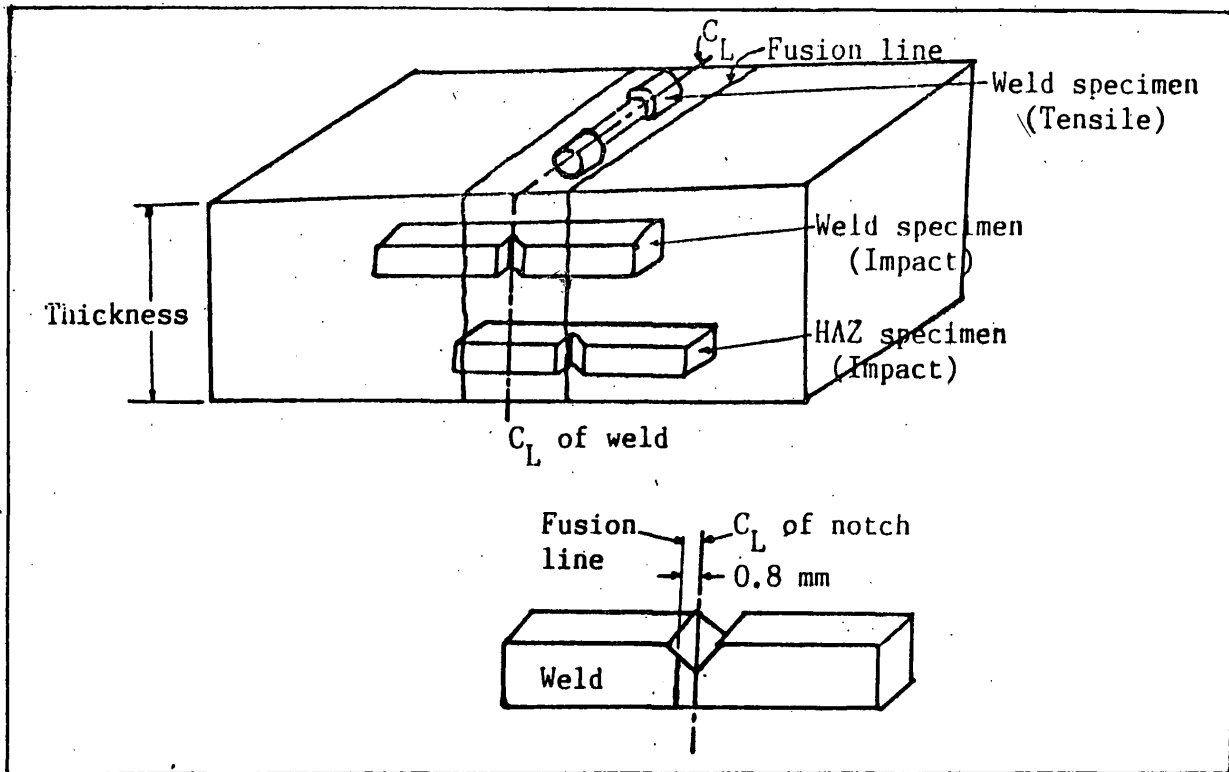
Location of Test Specimens Within Weld and Heat-Affected-Zone (HAZ) Test Material.
